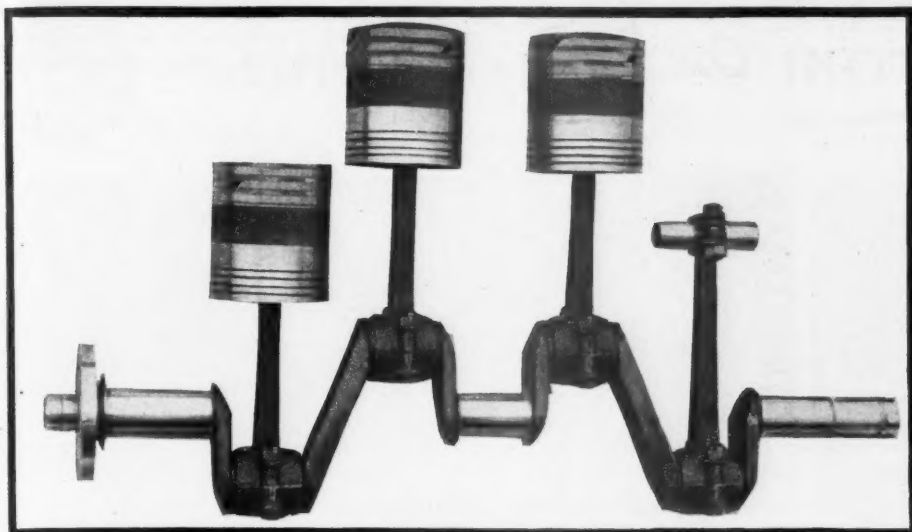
CRANKSHAFT, CONNECTING RODS AND PISTONS OF HAZARD MOTOR
